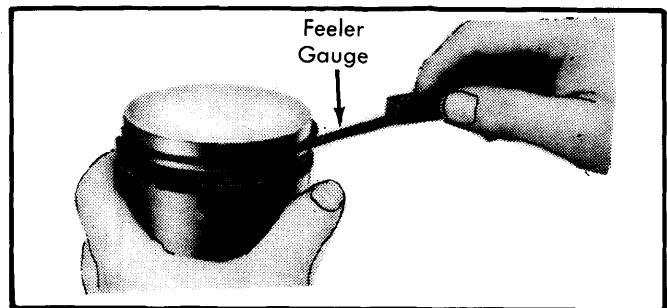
Measuring Piston Ring Side Clearance with Feeler Gauge
